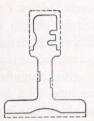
Machining cost of long cast-iron frame members is minimized by redesigning the section to an aluminum extrusion.
